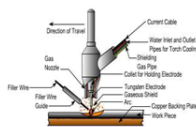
Principle of TIG Welding System (Courtesy: nptel.ac.in)
